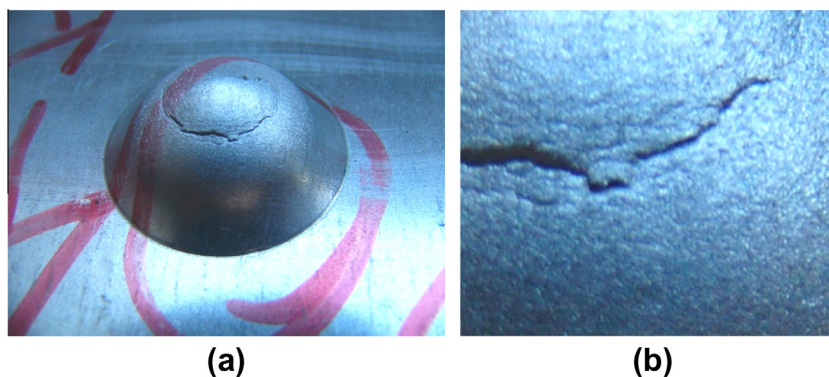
(a) Erichsens deep drawing test of Steel 2 sheet. Zn coating is cracked and the layer is peeled off the surface. (b) Detail of crack without contraction confirms worse workability of Steel 2.
